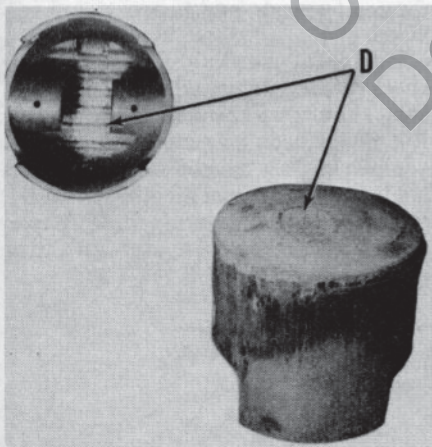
Top and bottom view of piston severely damaged by detonation. Spot (D) on top and bottom of crown show where metal has started to melt. Absence of scoring on skirt rule out seizure, overheating or lack of lubrication as a contributing cause.
